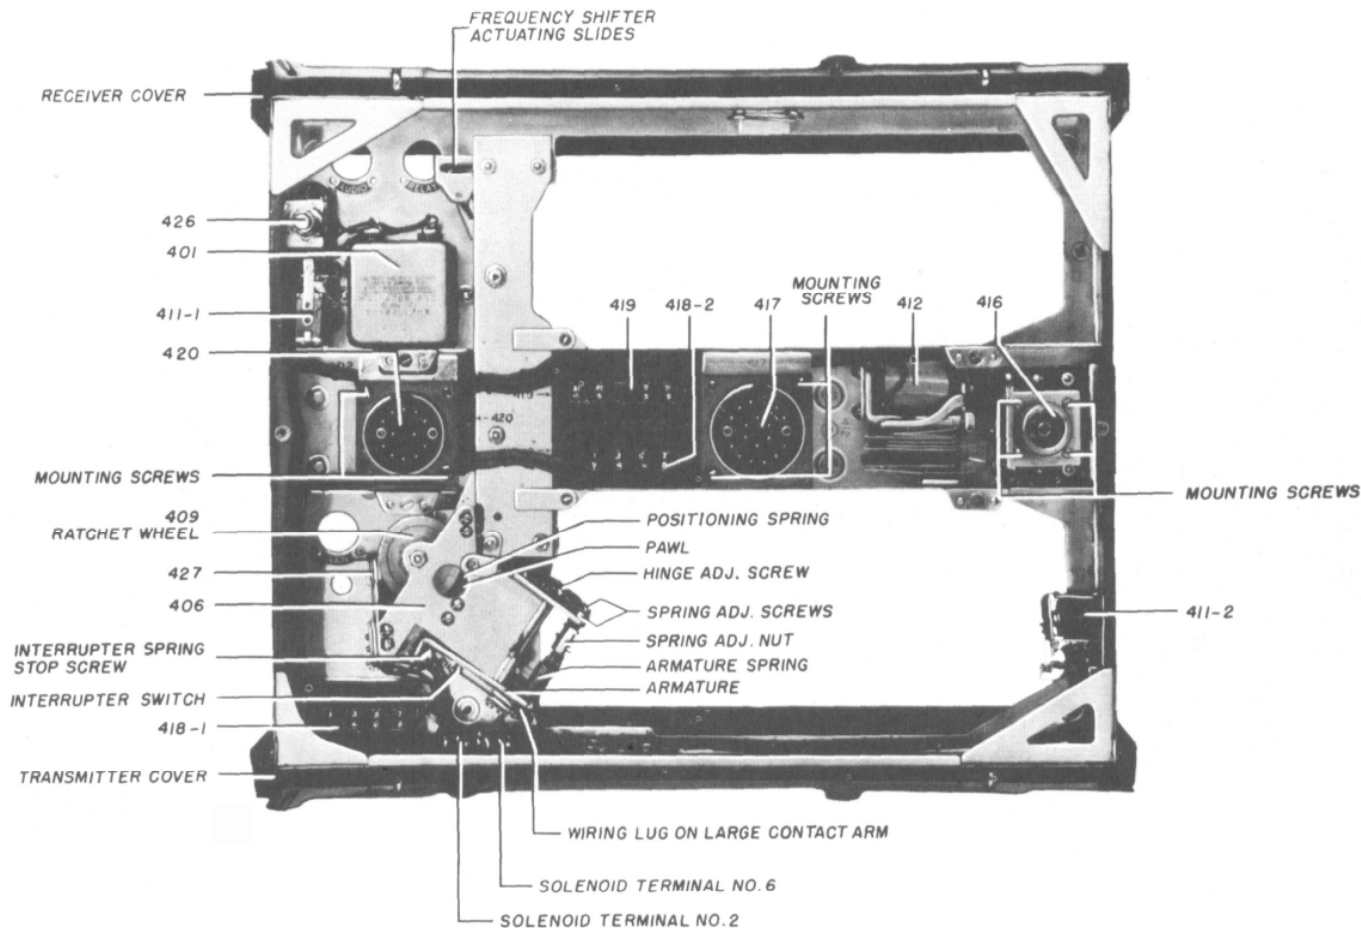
RACK FT-244-A, CENTER COVER REMOVED, TOP VIEW
